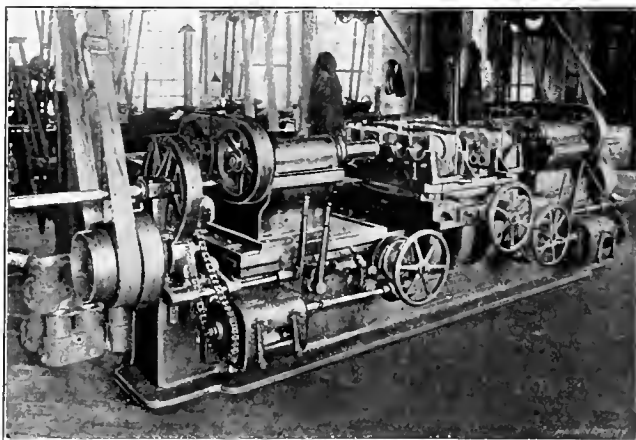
Four-cylinder Boring Machine with Revolving Table
